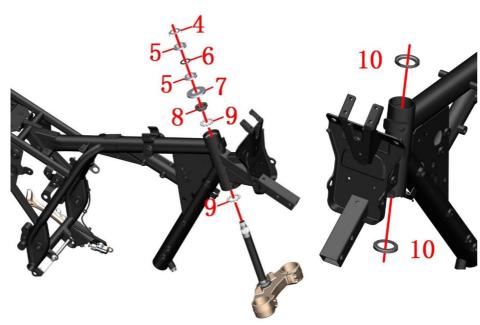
front fork component		Steering adjustment	CHK	(o)
